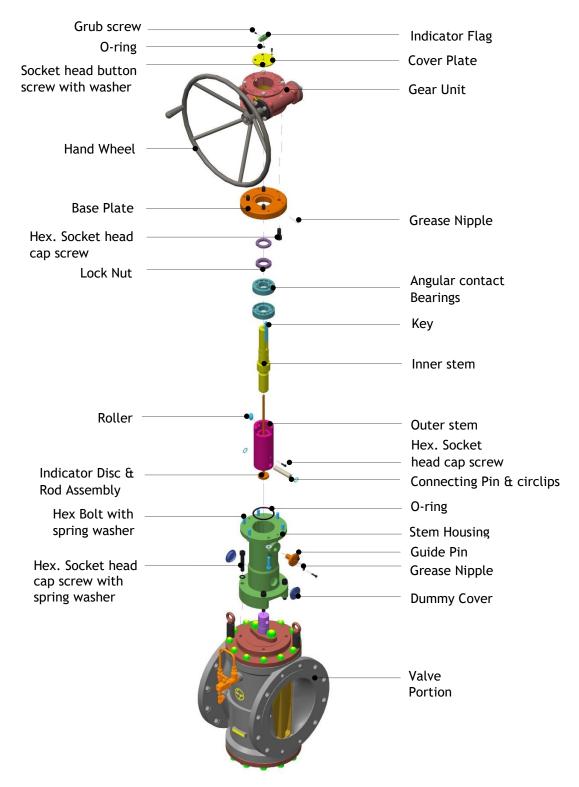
Exploded view - Double Block and Bleed Valve (Operator Portion)
